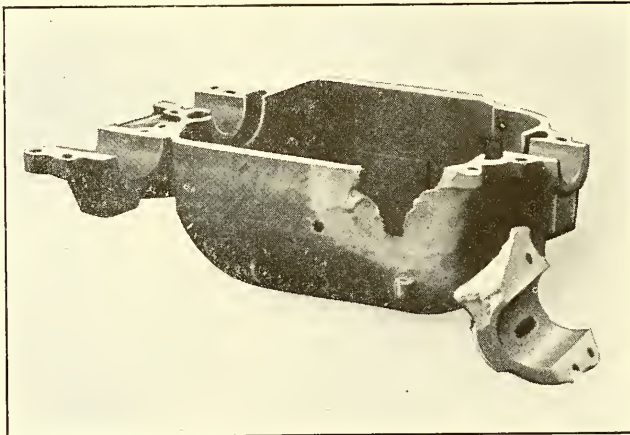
Motor Case with Broken Lug Previous to Welding.
